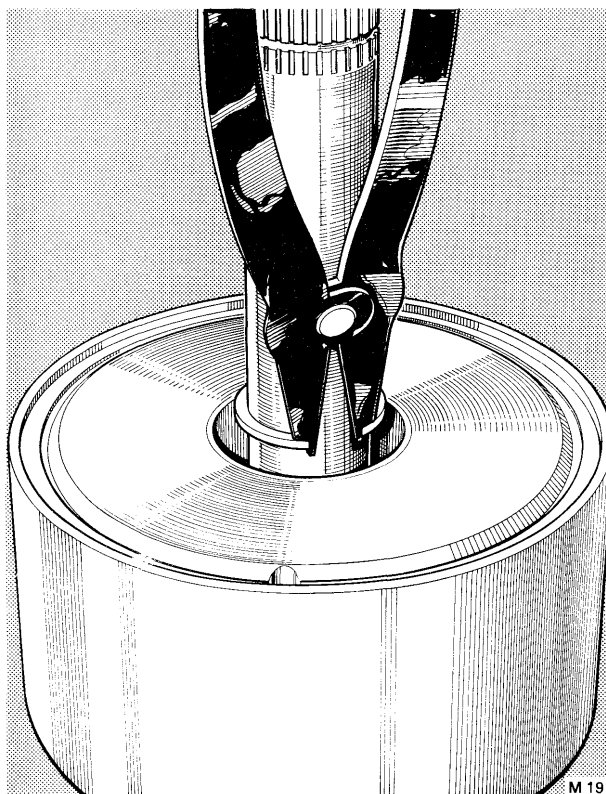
REMOVING THE FRONT DRUM RETAINING RING
